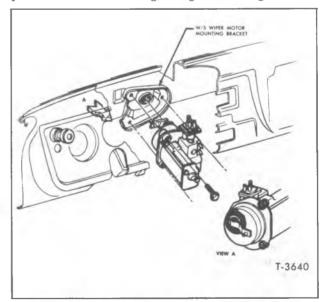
Wiper Motor Installed (Conv. Cab Model)
